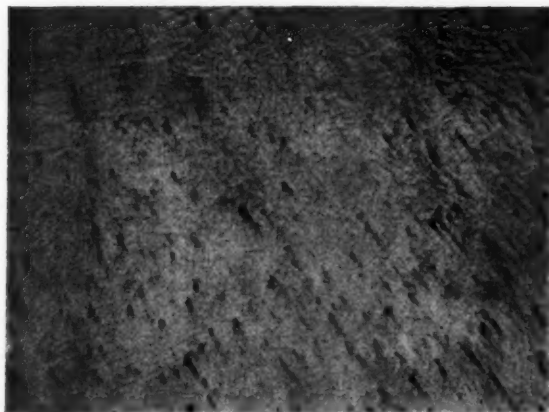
A—SURFACE OF CHILLED TREAD, 20 PER CENT COKE IRON
